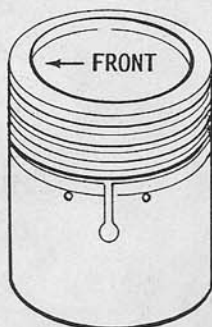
Install piston and connecting rod assemblies so that stamped arrow on piston head faces forward, and the oil spray hole (lower end of rod) faces away from camshaft side of engine.
